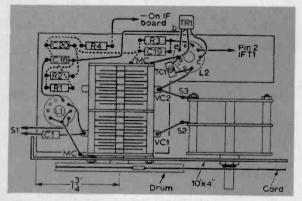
Layout of the mixer assembly built on an aluminium plate.
